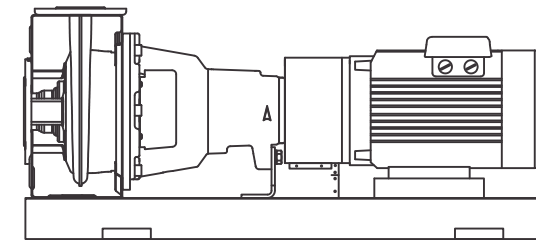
Schematic view of SNK pump-motor unit mounted on a base frame
